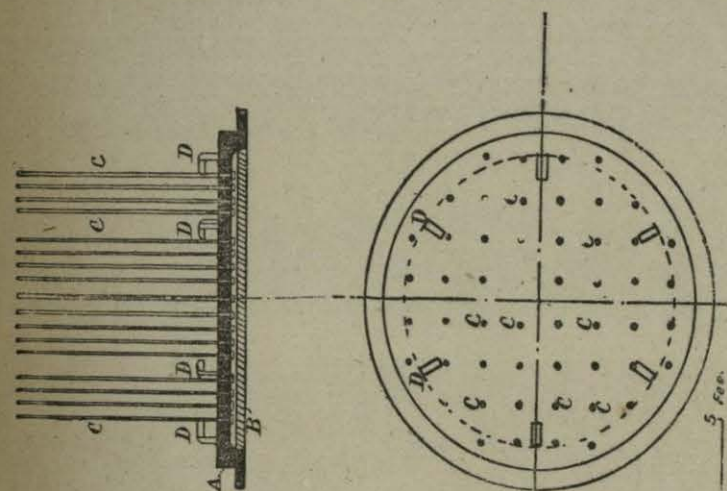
Plan and Elevation of Bottom-Plate, with twyer pins in position ready for iron casing to be fixed round previous to ramming—D, Lugs on bottom-plate to hold basic material; C, pins.
